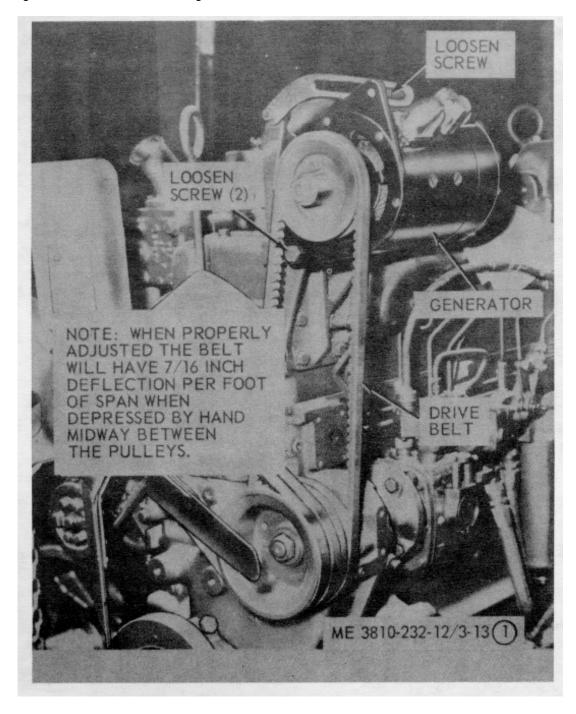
Crane engine V-belt adjustments. Sheet 1 of 3
